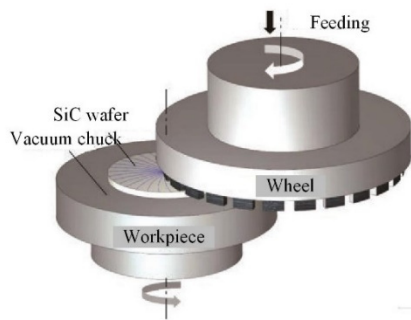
Ultra-precision grinding technology employs workpiece rotation method
